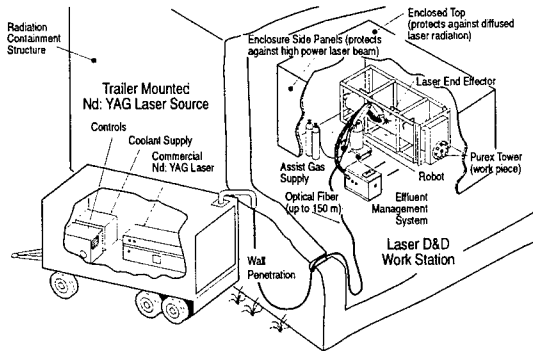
D&D laser cutting setup with a 3 kW Nd:YAG
